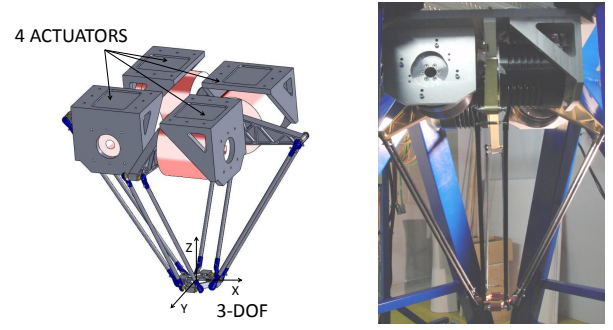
Views of the R4 parallel manipulator: Schematic view of the CAD design (left), side view of the robot prototype (right)
